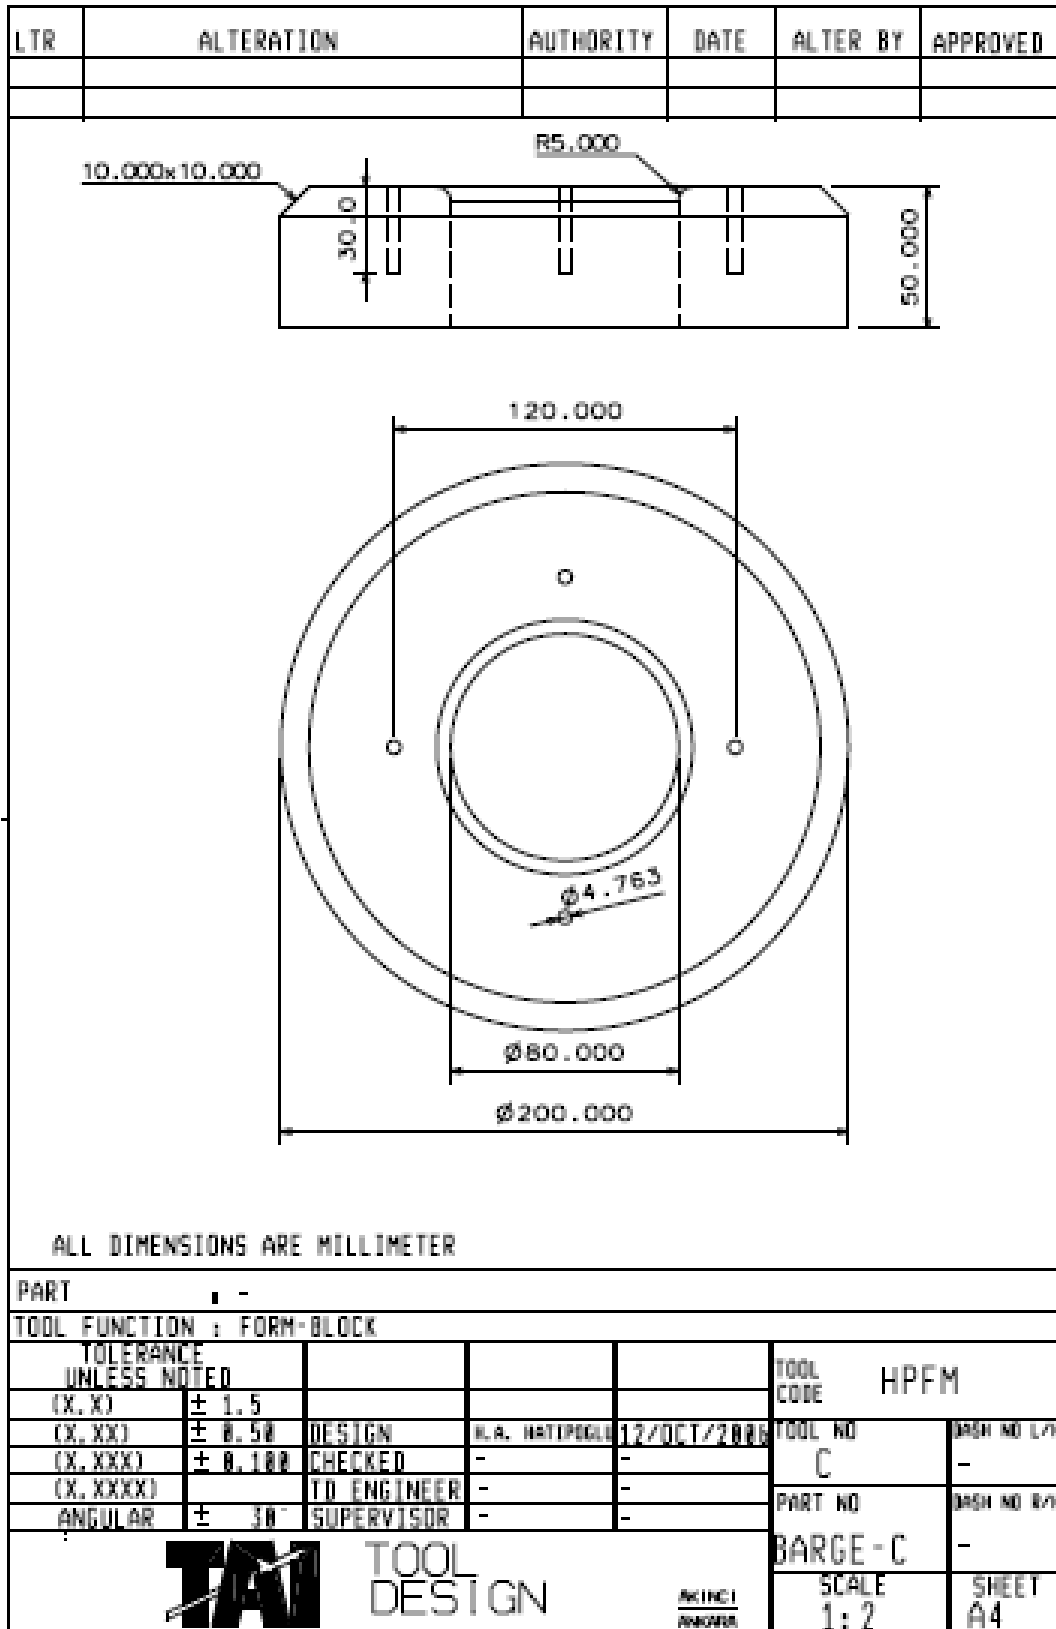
Technical drawing of the die used in the circular bulging experiment.
